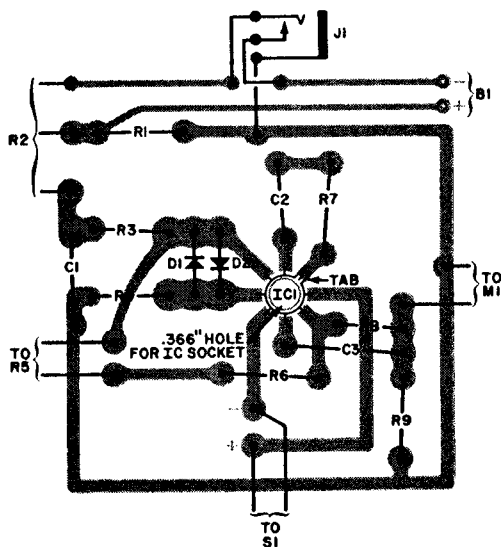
Install the components as shown here. Note that J1 is arranged to close when plug is inserted.
